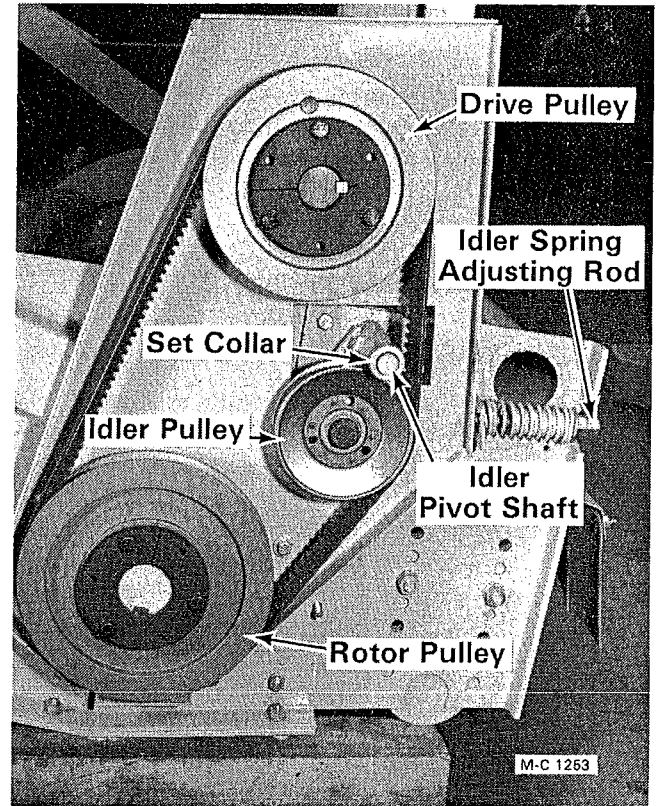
TC Model Shown. On FM Models Rotor and Drive Pulley Are Interchanged.
